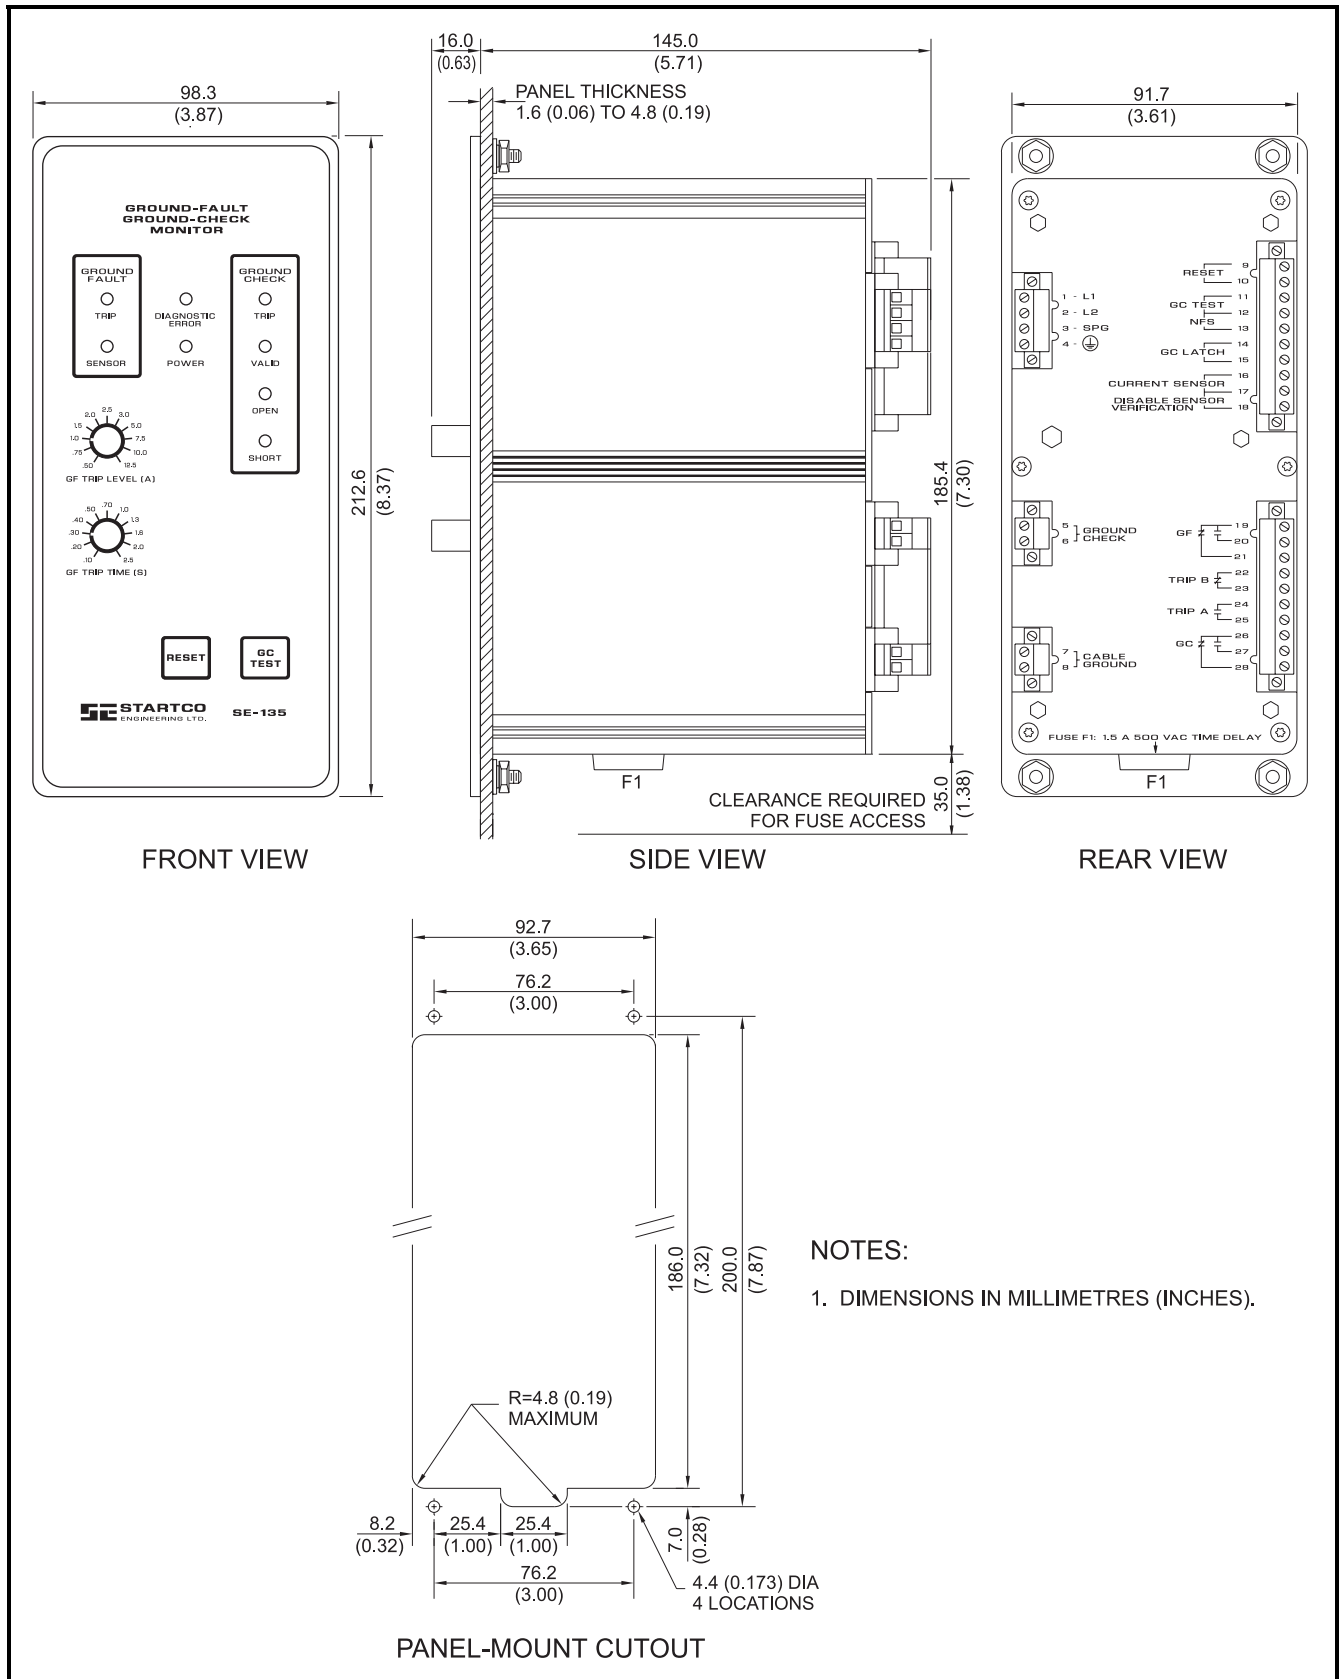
SE-135 Outline and Panel-Mounting Details.
